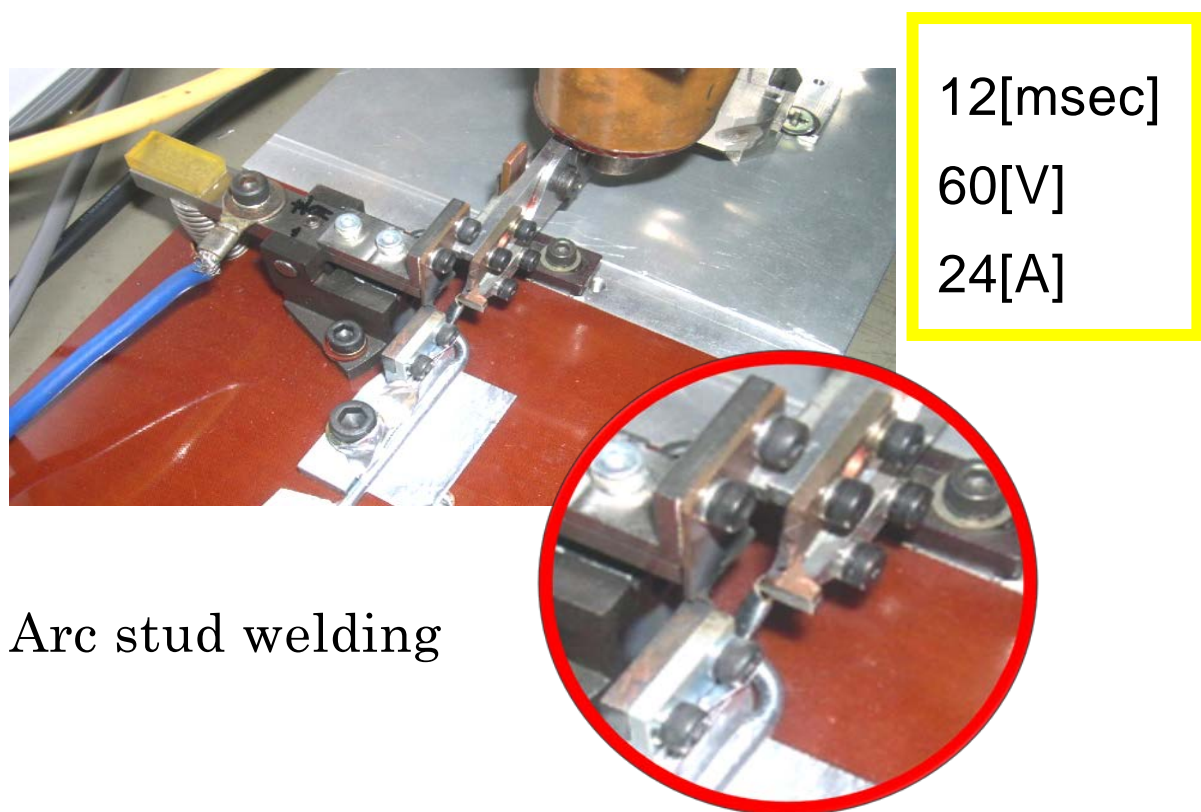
Arc stud welding equipment for electrical wire.
